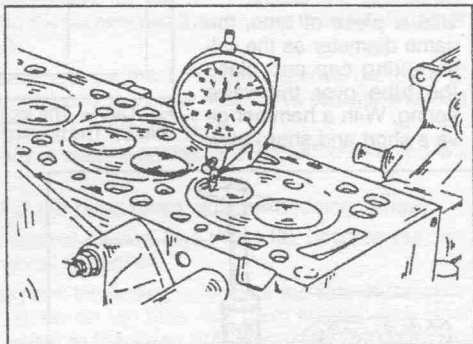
Measuring the height of the valve head surfaces below the cylinder head face.
